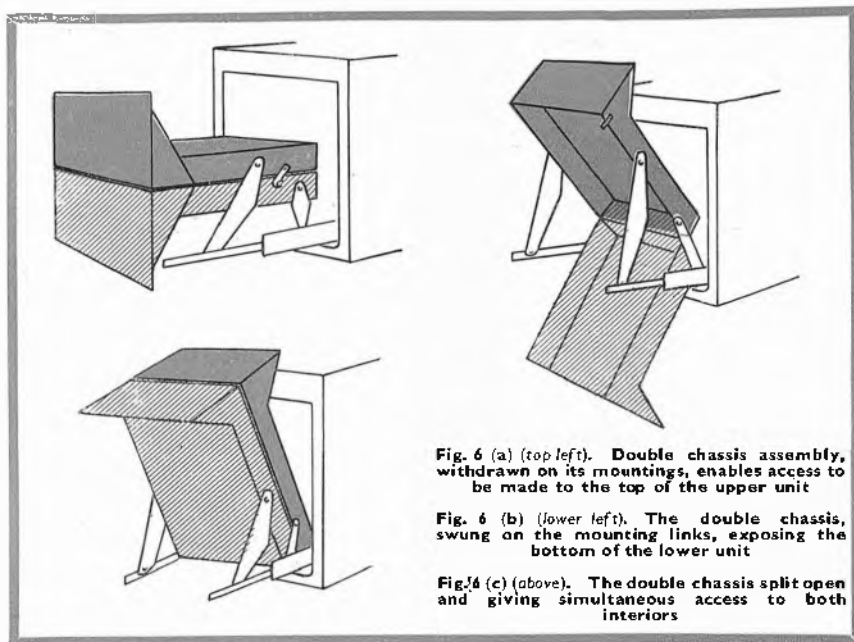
(a) (top left). Double chassis assembly, withdrawn on its mountings, enables access to be made to the top of the upper unit
